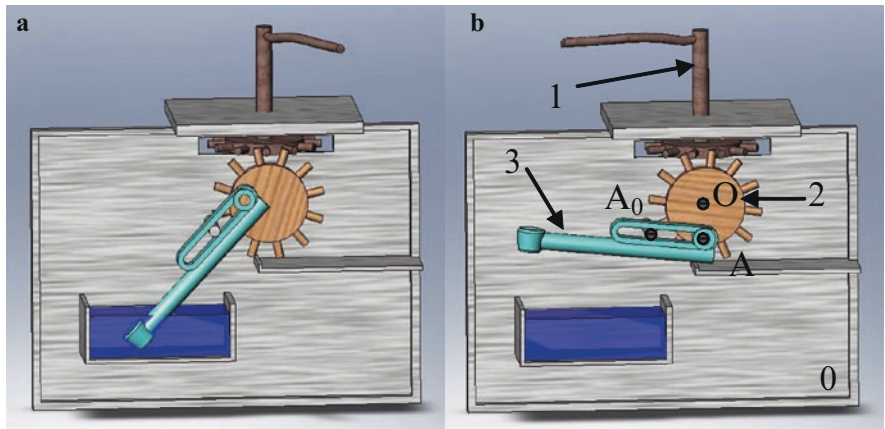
a 3D CAD model of Al-Jazari's fourt water raising machine. (a) Lower position, (b) upper position
